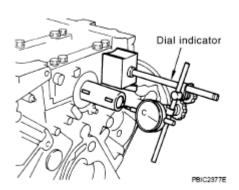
Measuring Clearance Between Thrust Bearings And Crankshaft Arm
